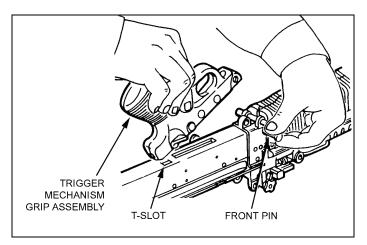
Replacement of the trigger mechanism grip assembly.
